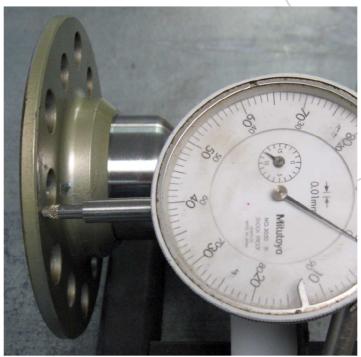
Dial Indicator Position for Crankshaft & Prop Flange Run Out
